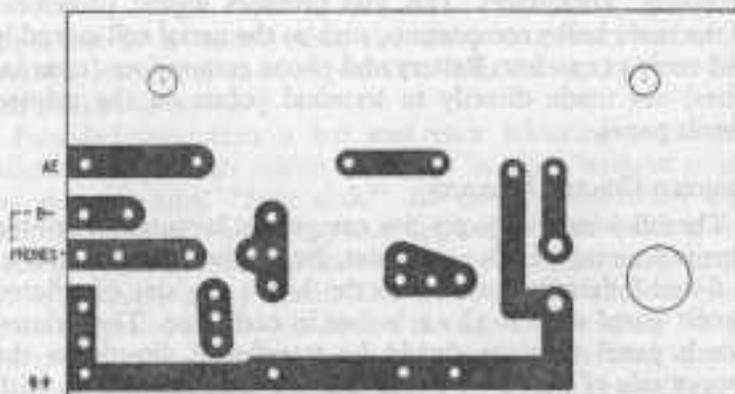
PRINTED CIRCUIT PANEL FOR DESIGN NO. 4 CIRCUIT.
